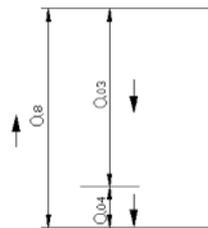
Roller sleeve assembly dimension chain Fig.14 on the frame assembly tolerances
